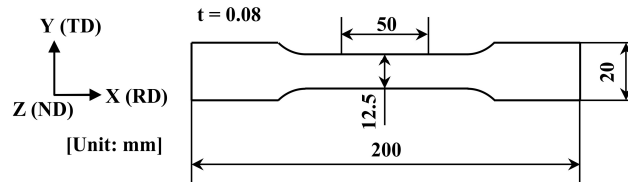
Schematic of uniaxial tensile specimen of ultra-thin FSS sheet.
